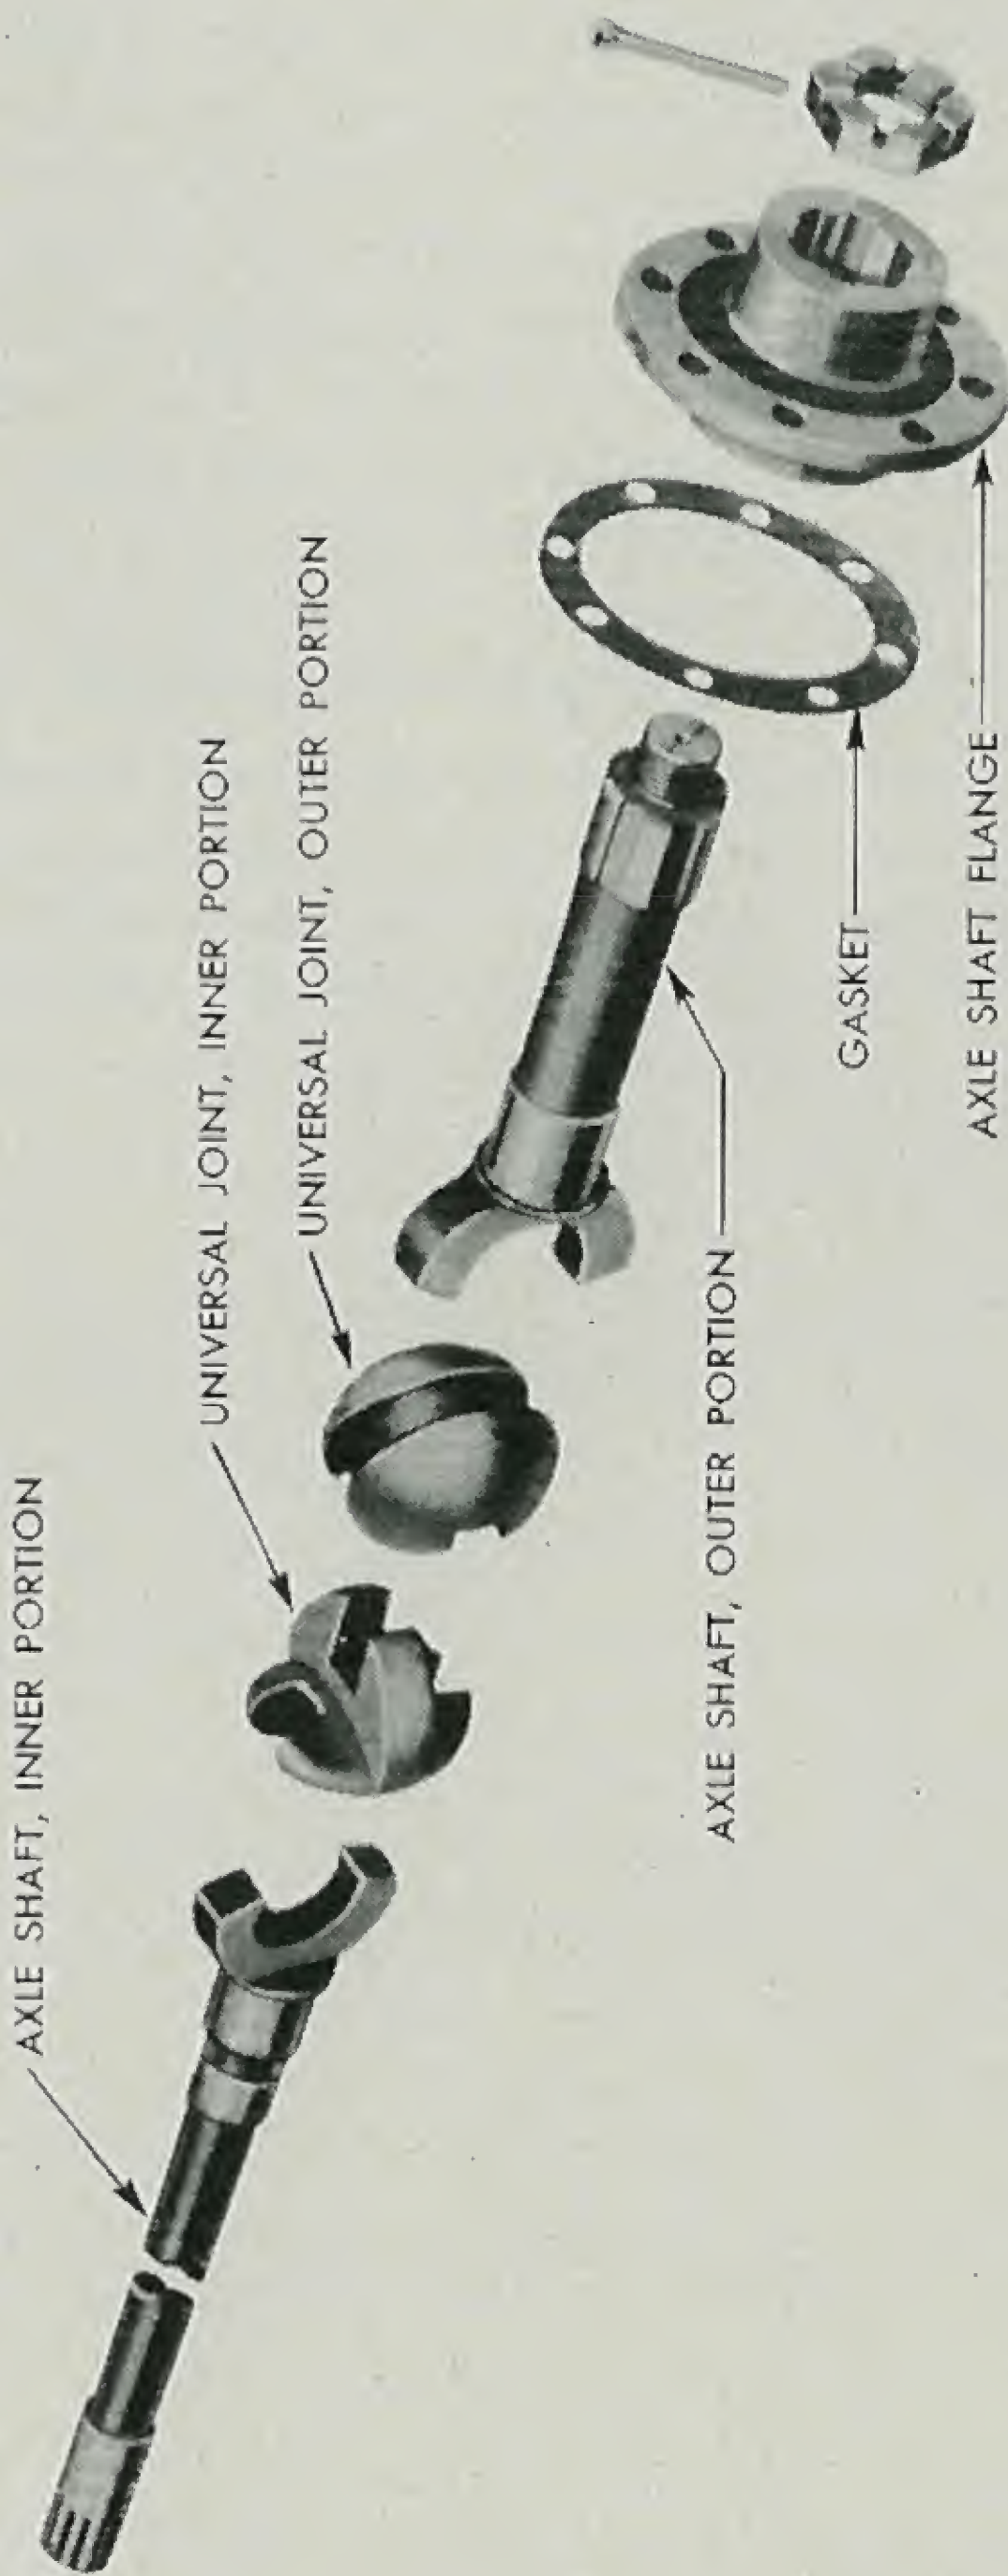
Front Axle Drive Shaft and Universal Joint, Disassembled
